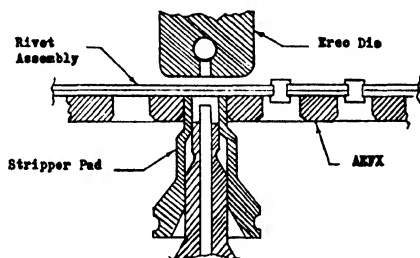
Combination Fixture Positioned in Riveter. (The abbreviation AEFX denotes the fixture body.)
